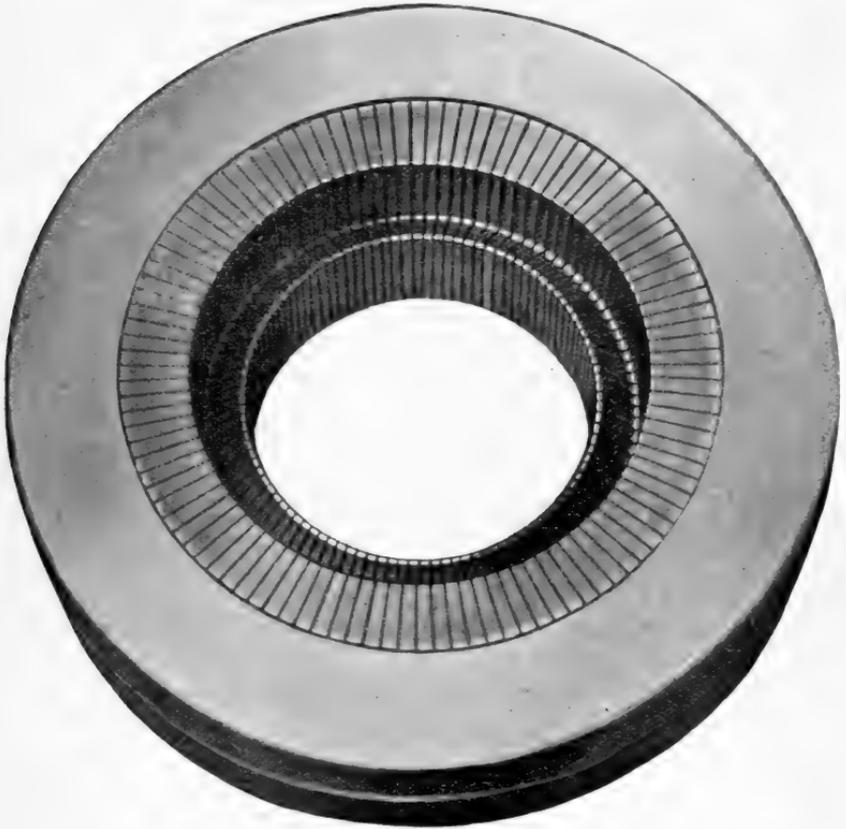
Machined Commutator in Building Ring ready for Bush
